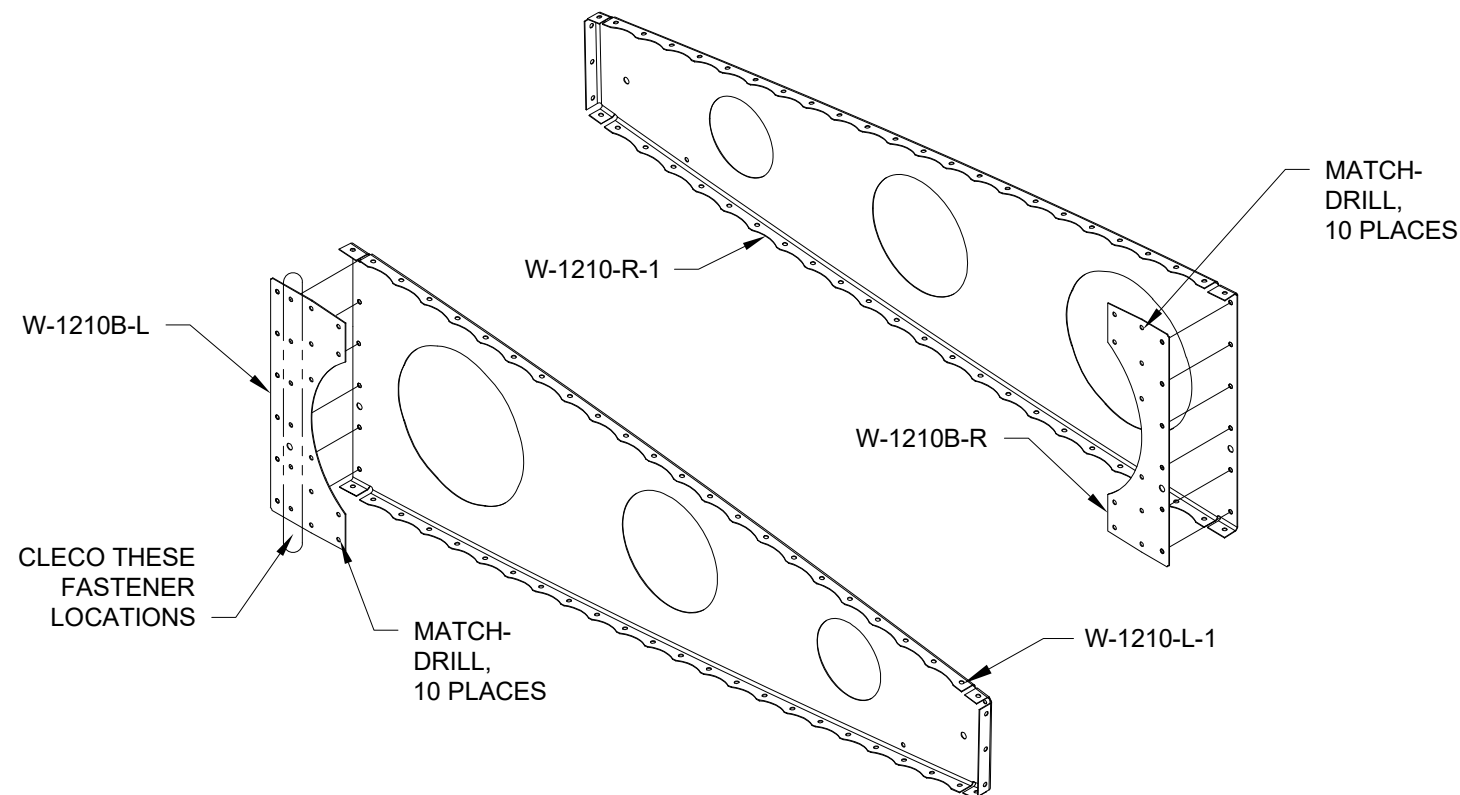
MATCH-DRILLING THE RIB DOUBLERS AND MAIN RIBS
